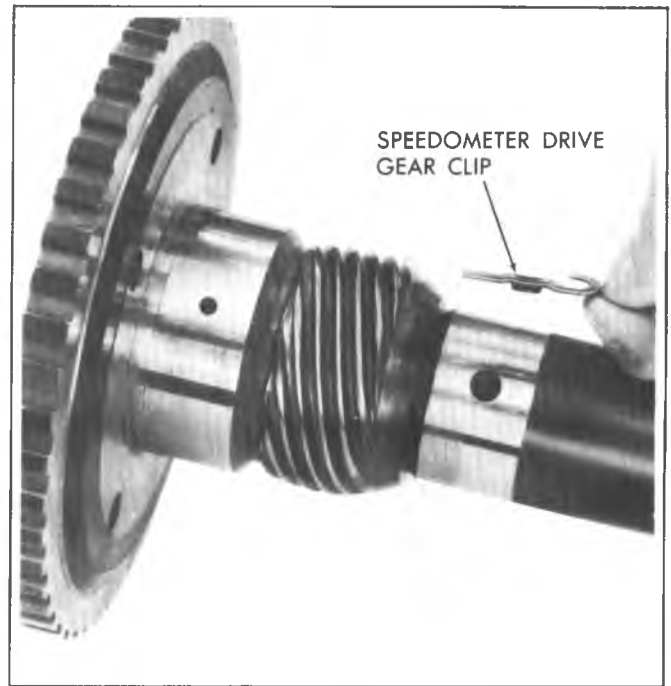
A-54C--Installing Speedometer Drive Gear Clip
